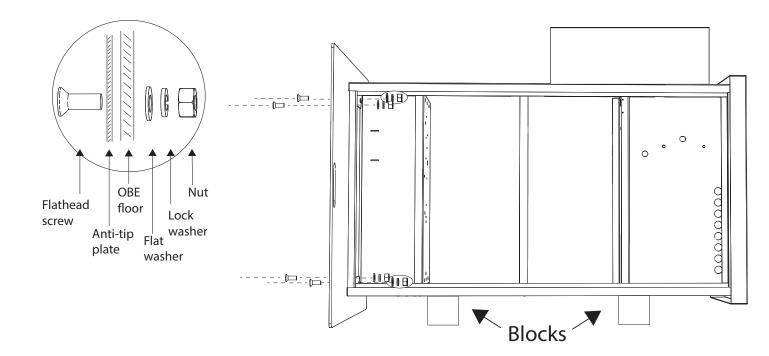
, Mounting with Anti-tip Plate (P/N 746-055-20-001)
